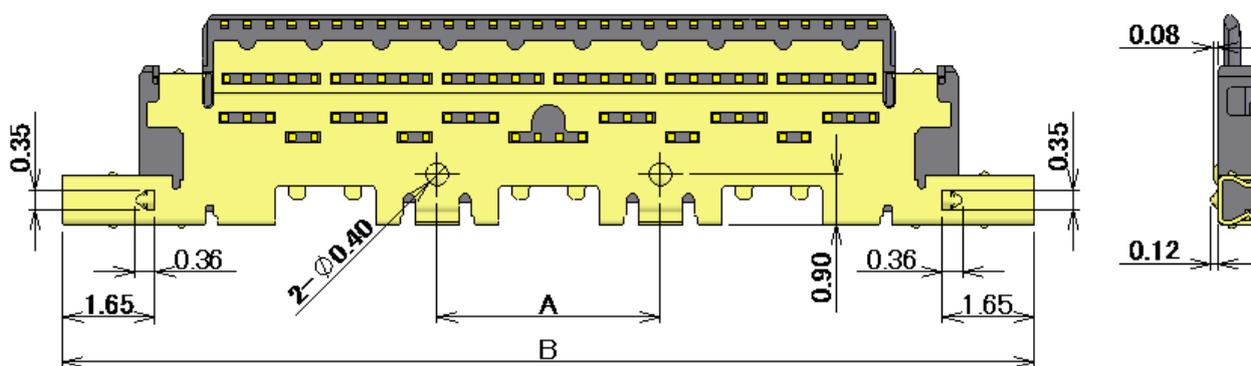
The Shell Bottom Side of Plug Housing Assembly
